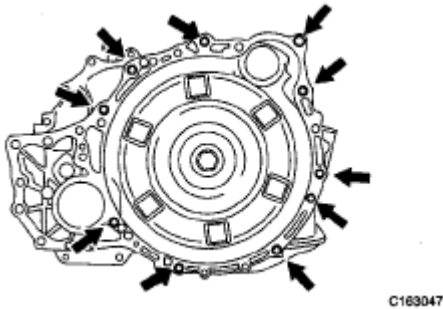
Locating Automatic Transaxle Assembly Bolts
